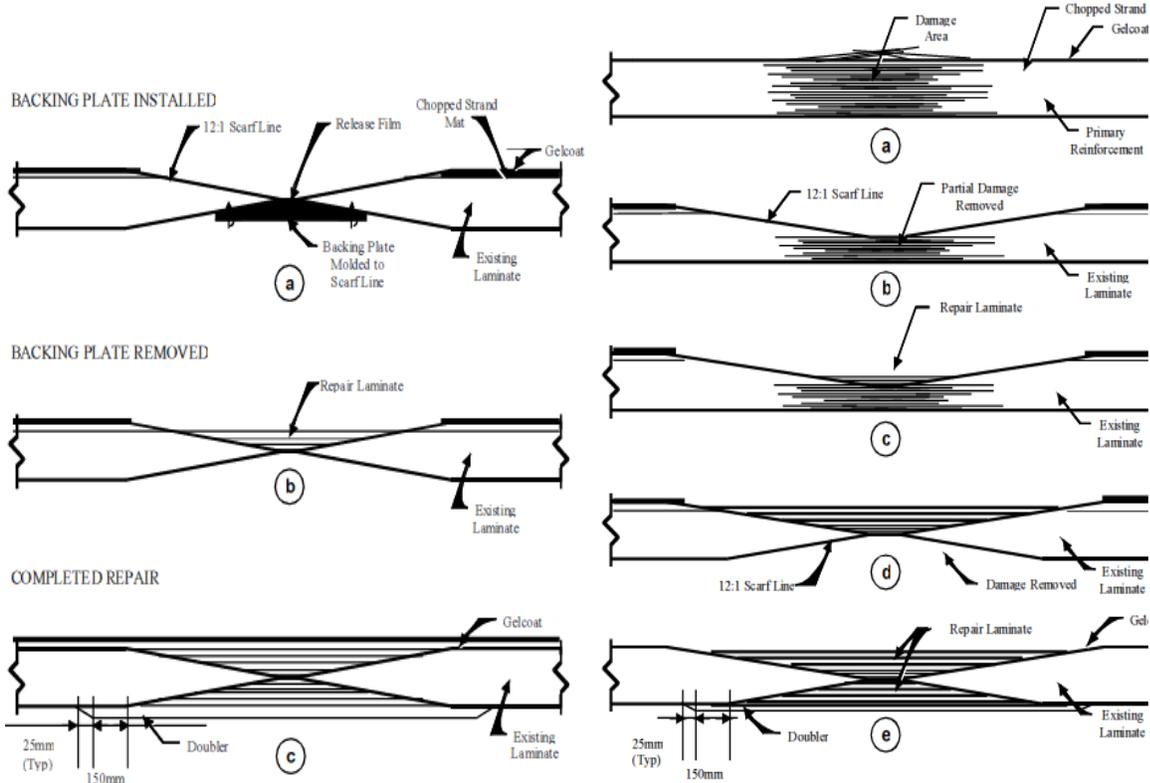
Repairing through the thickness damage repair Scarf Joints (left); Surface damage (gouges/abrasions and surface cracks) repair (right) (Source: Green E., 1999)
